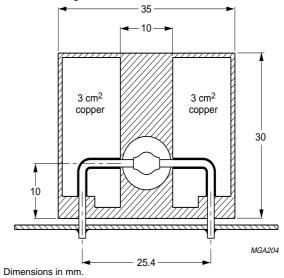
Mounting with additional printed circuit board for heat sink purposes.
